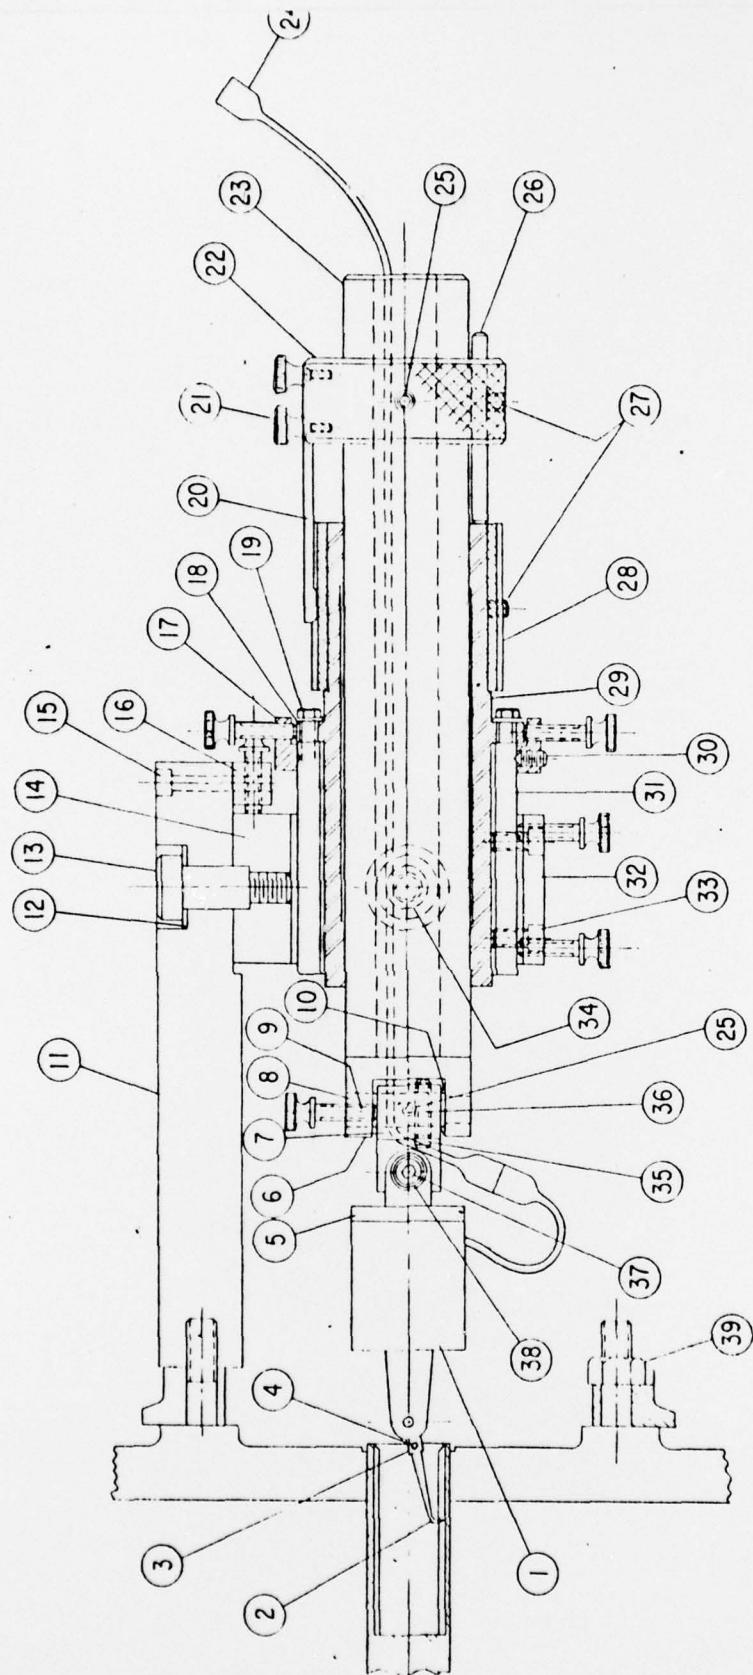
PARTS CALL OUT FOR GEARBOX SPLINE
